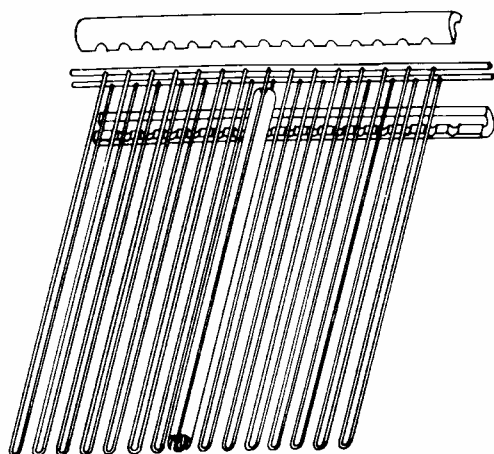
U-tube and heat removal fin used for pressurised all-glass evacuated tube solar collector.
